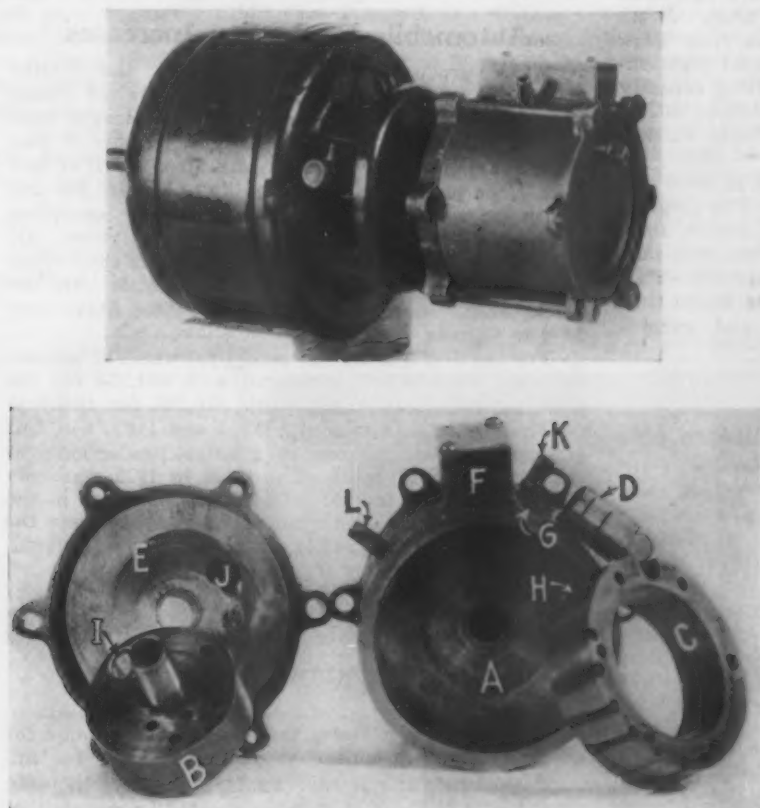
(at the left)—Disassembled View Showing Component Parts of the Rotary Compressor
